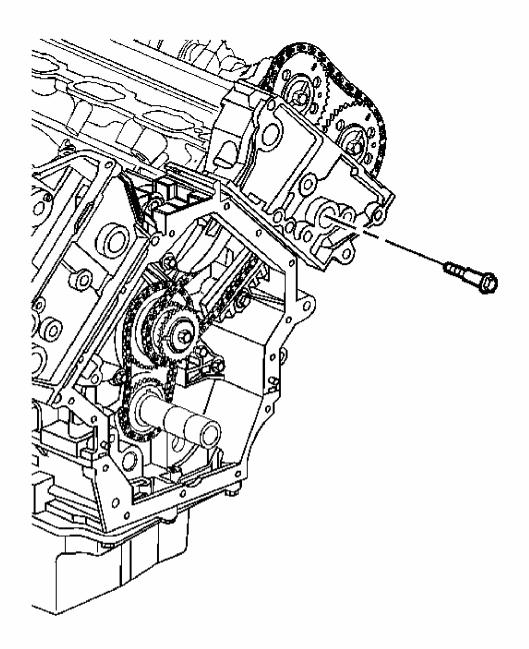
Identifying Upper Left Secondary Camshaft Drive Chain Guide Bolt Courtesy of GENERAL MOTORS CORP.
